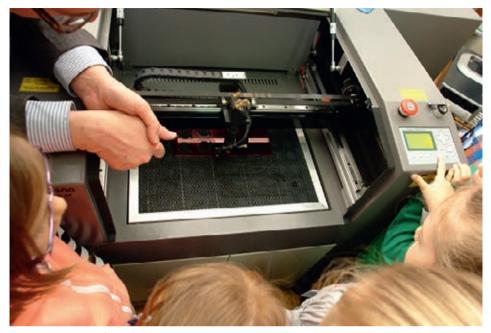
Adjustment of the head position in Laser–500 cutter (photo by M. Pasternak)
